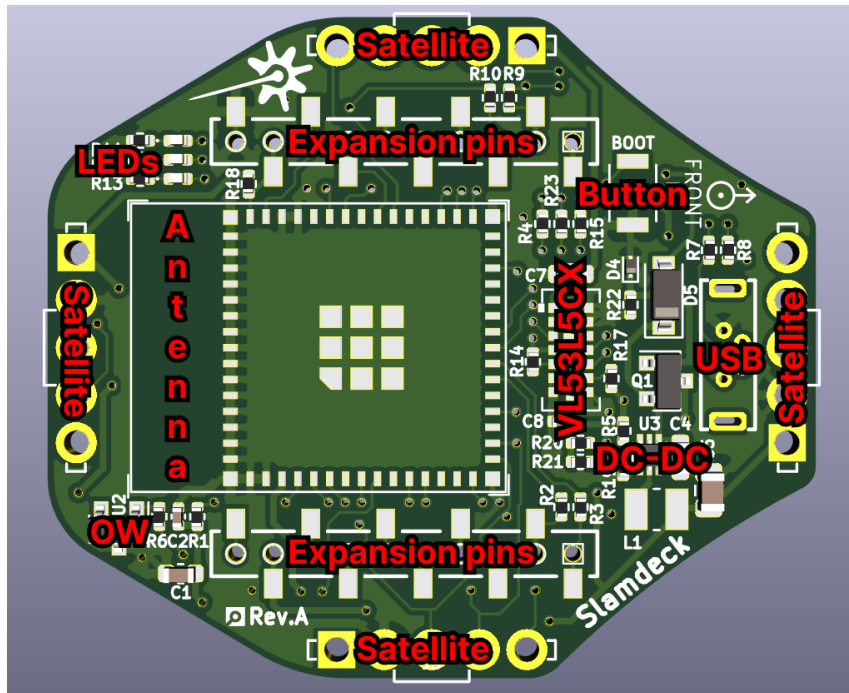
Main PCB board front view with description of certain components. OW is the 1-Wire memory.
